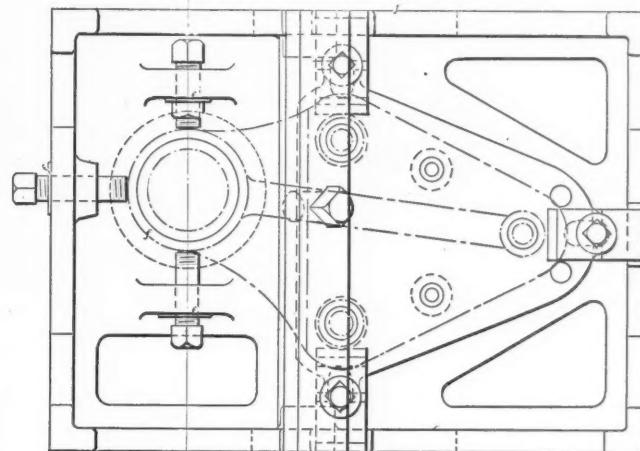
Plan and Elevation of the Jig shown in Fig. 97.
